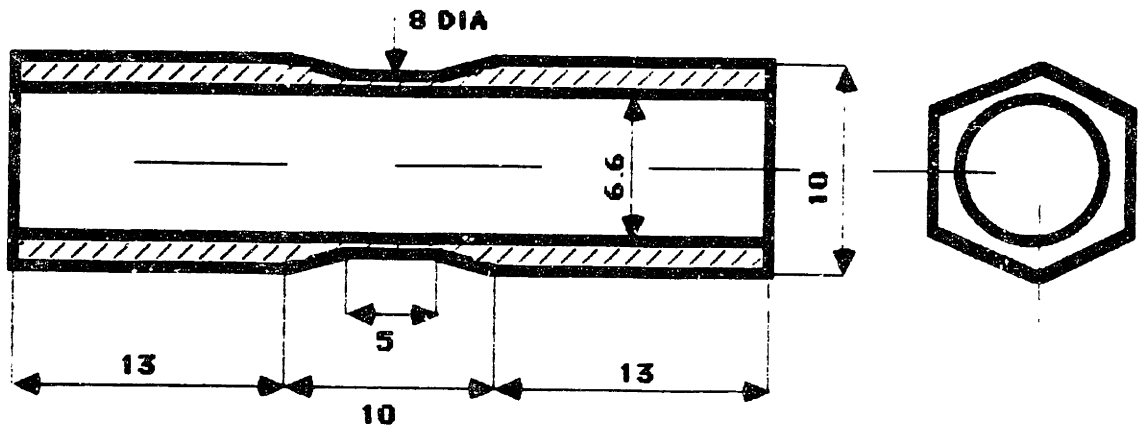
Thin-wall torsion specimen. Dimensions in mm.
